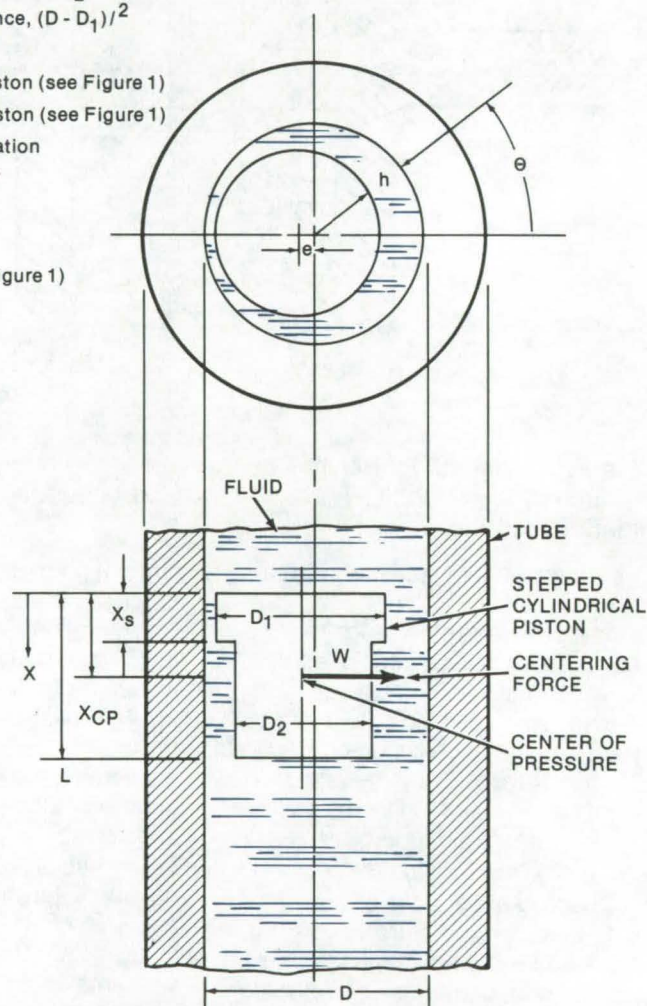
Stepped Cylindrical Piston in a cylindrical tube can be designed to center itself within the tube and thus minimize "leakage" past the piston.
